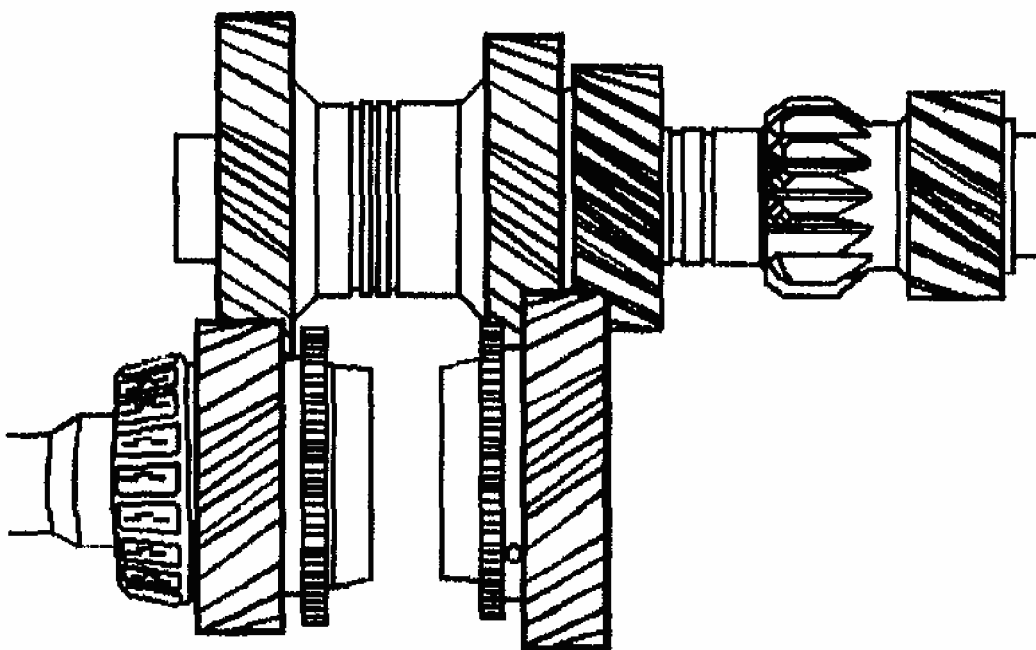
Inspecting Bearings & Journals For Roughness & Unusual Wear Or Damage
